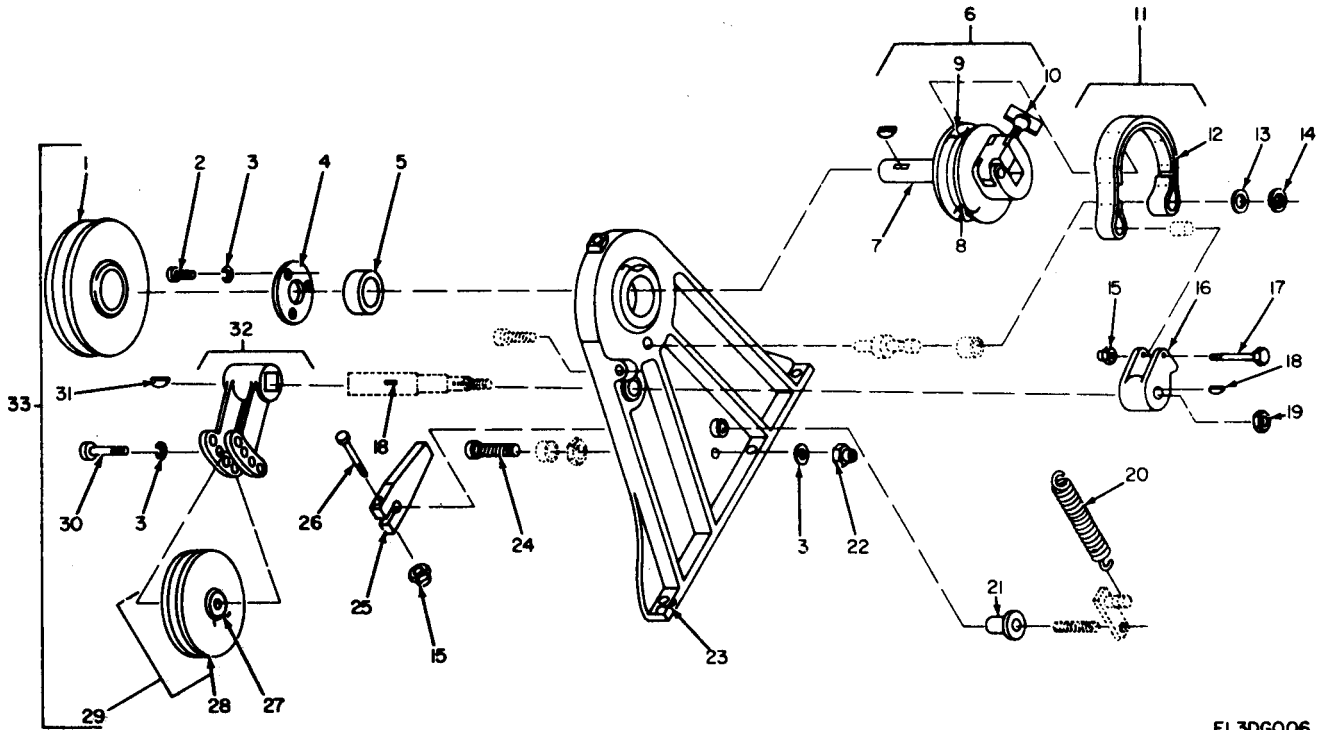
Reeling Machines, Cable, Motor Driven RL-172/G and RL-172A/G (Sheet 3 of 3).
